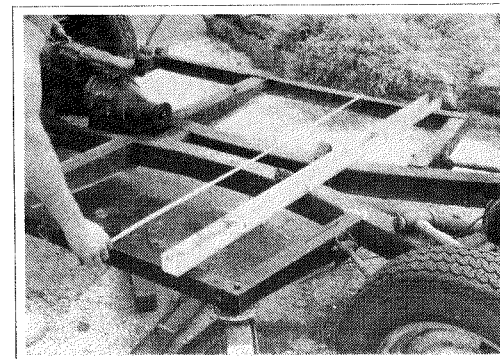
At this point, the rear outrigger can be bolted onto the radius arm. So assuming the tyre wear pattern was OK before, the positioning of the new outrigger, front to rear, will be accurately set - this only works if the wheel hasn't been allowed to move. The side rail can then be temporarily set in place, located at the front and rear corners by dropping a couple of bolts through the relevant holes. Place a jack under the rear corner and level up the frame with the aid of a straight edge side rail. The width can be checked against previous measurements/workshop manual.
